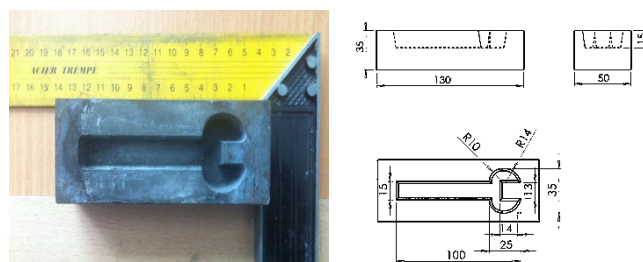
Dimension and picture of the AISI 1040 steel mould
